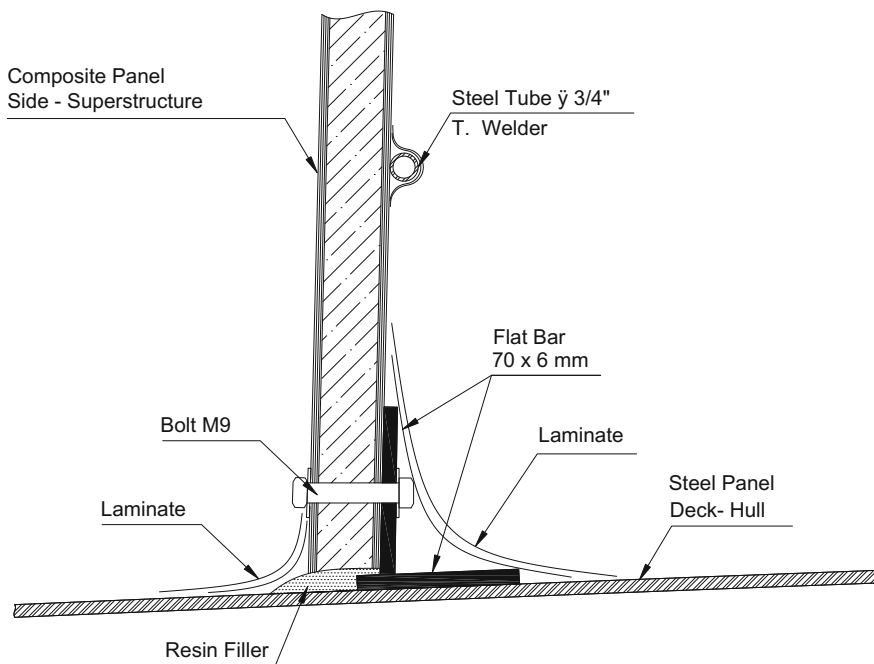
Structural detail, connection between deck panels (steel) and superstructure composite
